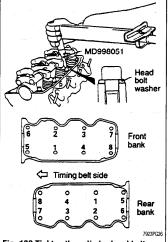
Tighten the cylinder head bolts according to the sequence shown-3.0L (SOHC and DOHC) engines
